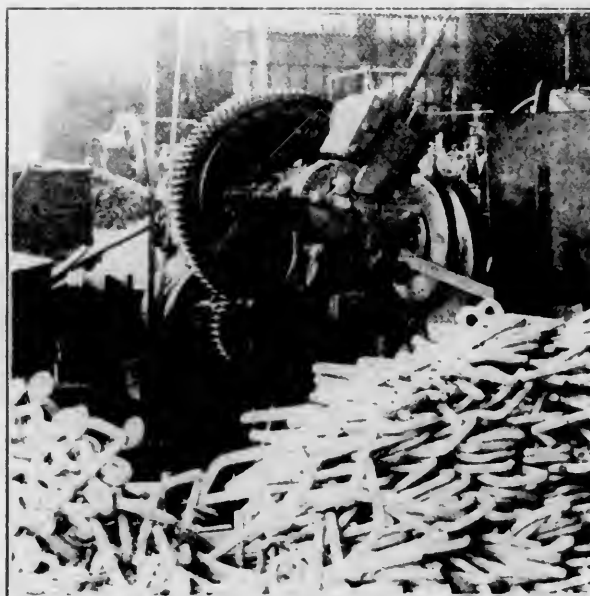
EYE-BOLT MACHINE FOR BENDING THE ENDS OF THE BRAKE HANGERS.
